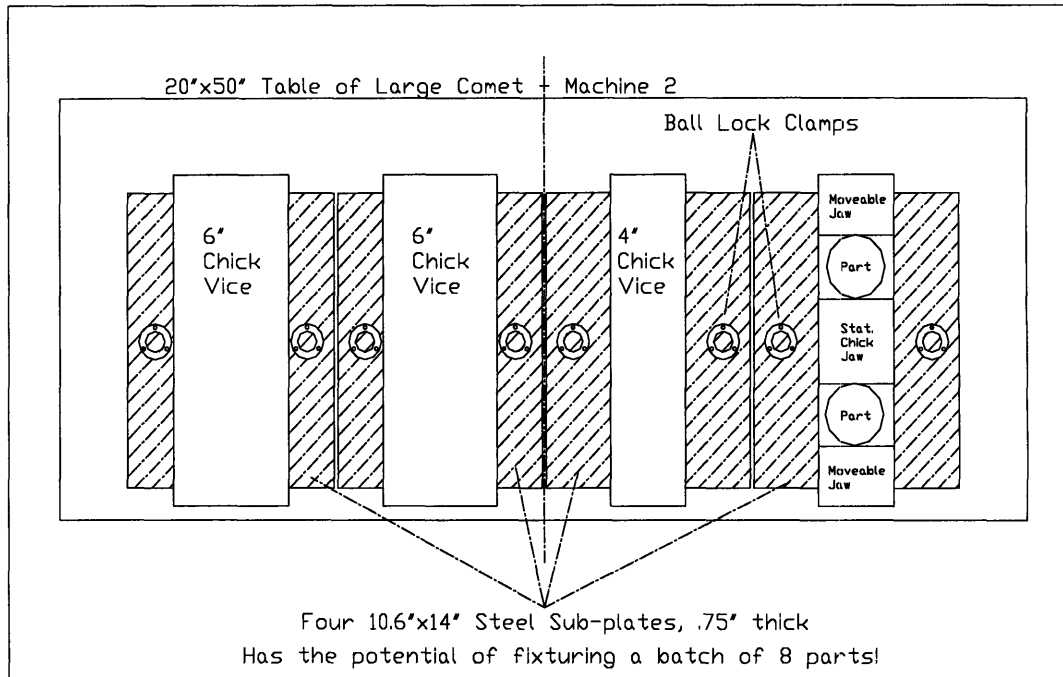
Layout of Vises and Sub-Plates on the Table of a CNC Machine
